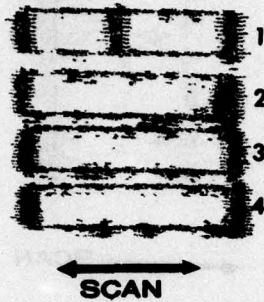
C-scan Recording of 45 MHz, 18° Surface Wave Inspection of Tensile Surfaces of Boron Doped SSiC Four-Point-Bend Specimens.
